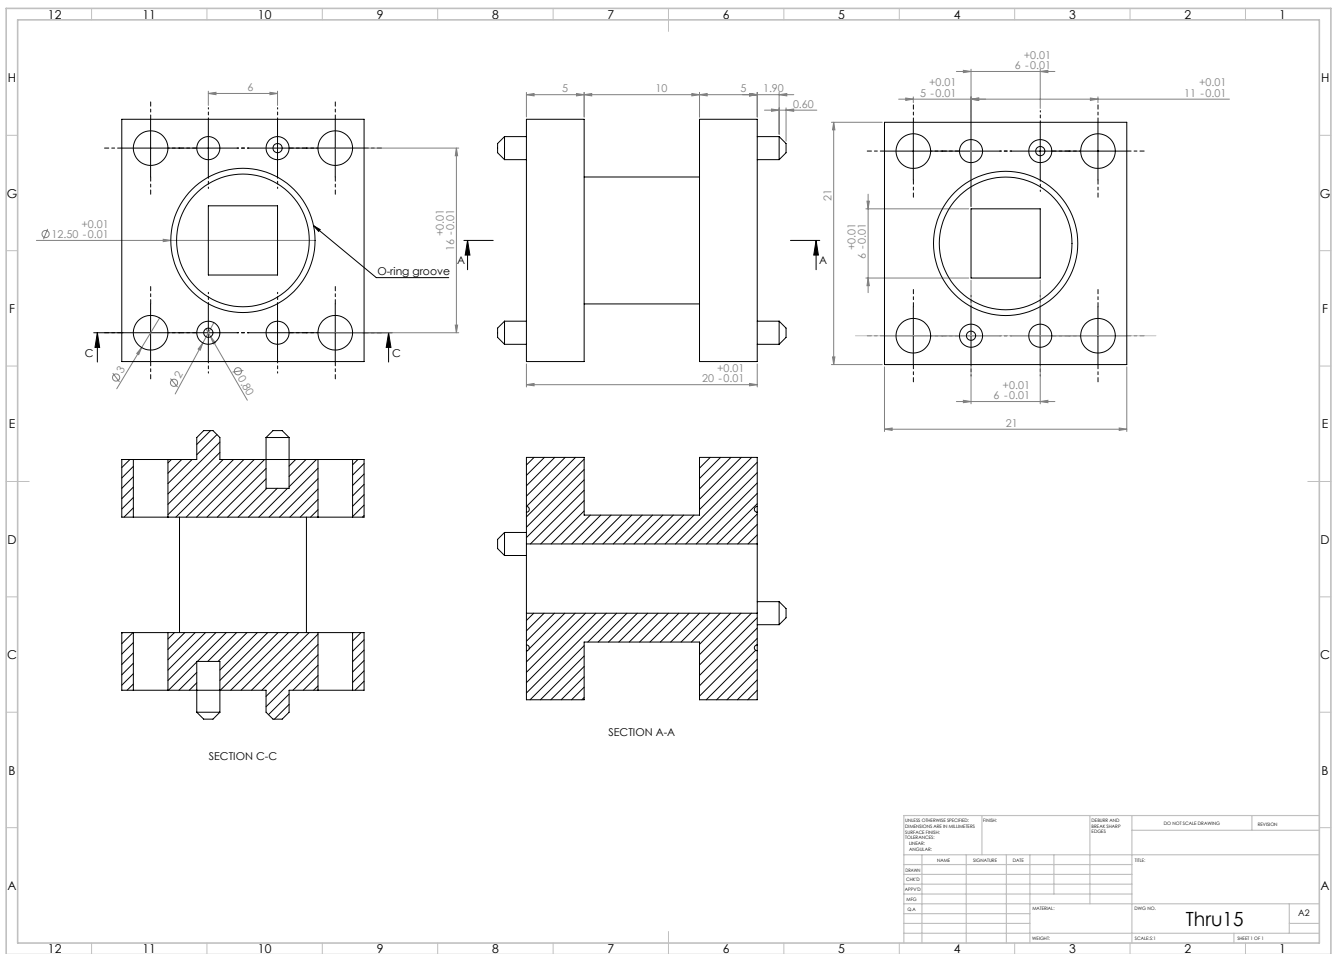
Solidworks technical drawing of a proposed Thru to be 3D printed for calibrating the dual port system.
